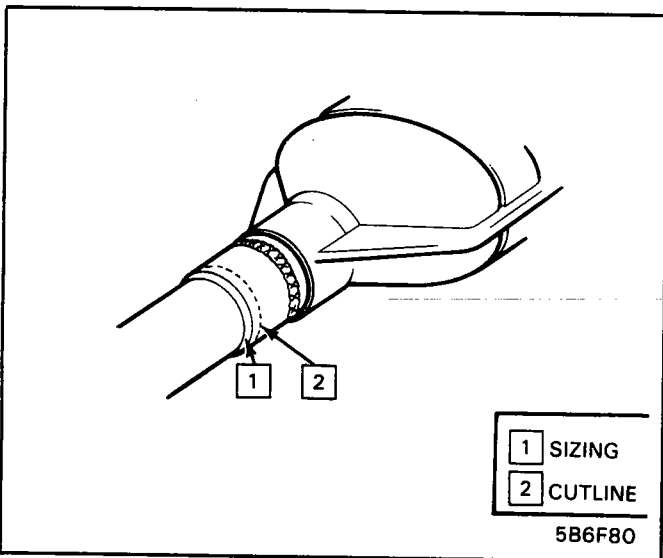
F-1 "N" Series Exhaust or Intermediate Pipe Cut Location
